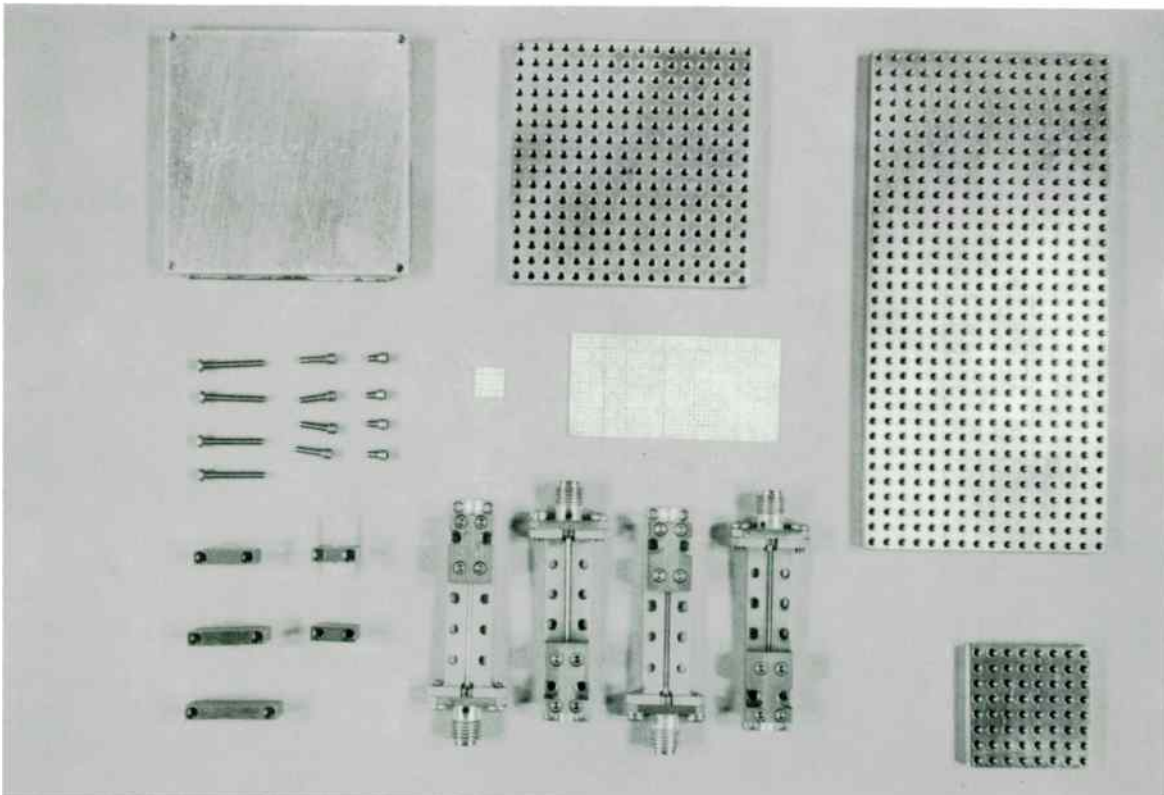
These component parts of the modular test system allow the engineer to RF test any device or subsystem to 26.5GHz.
